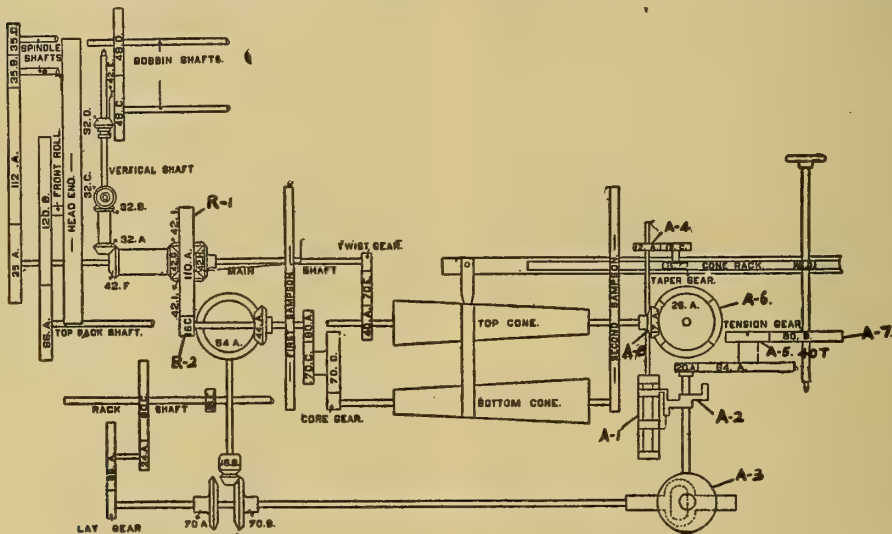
Diagram of Gearing Showing Cones and Cone Belt.
